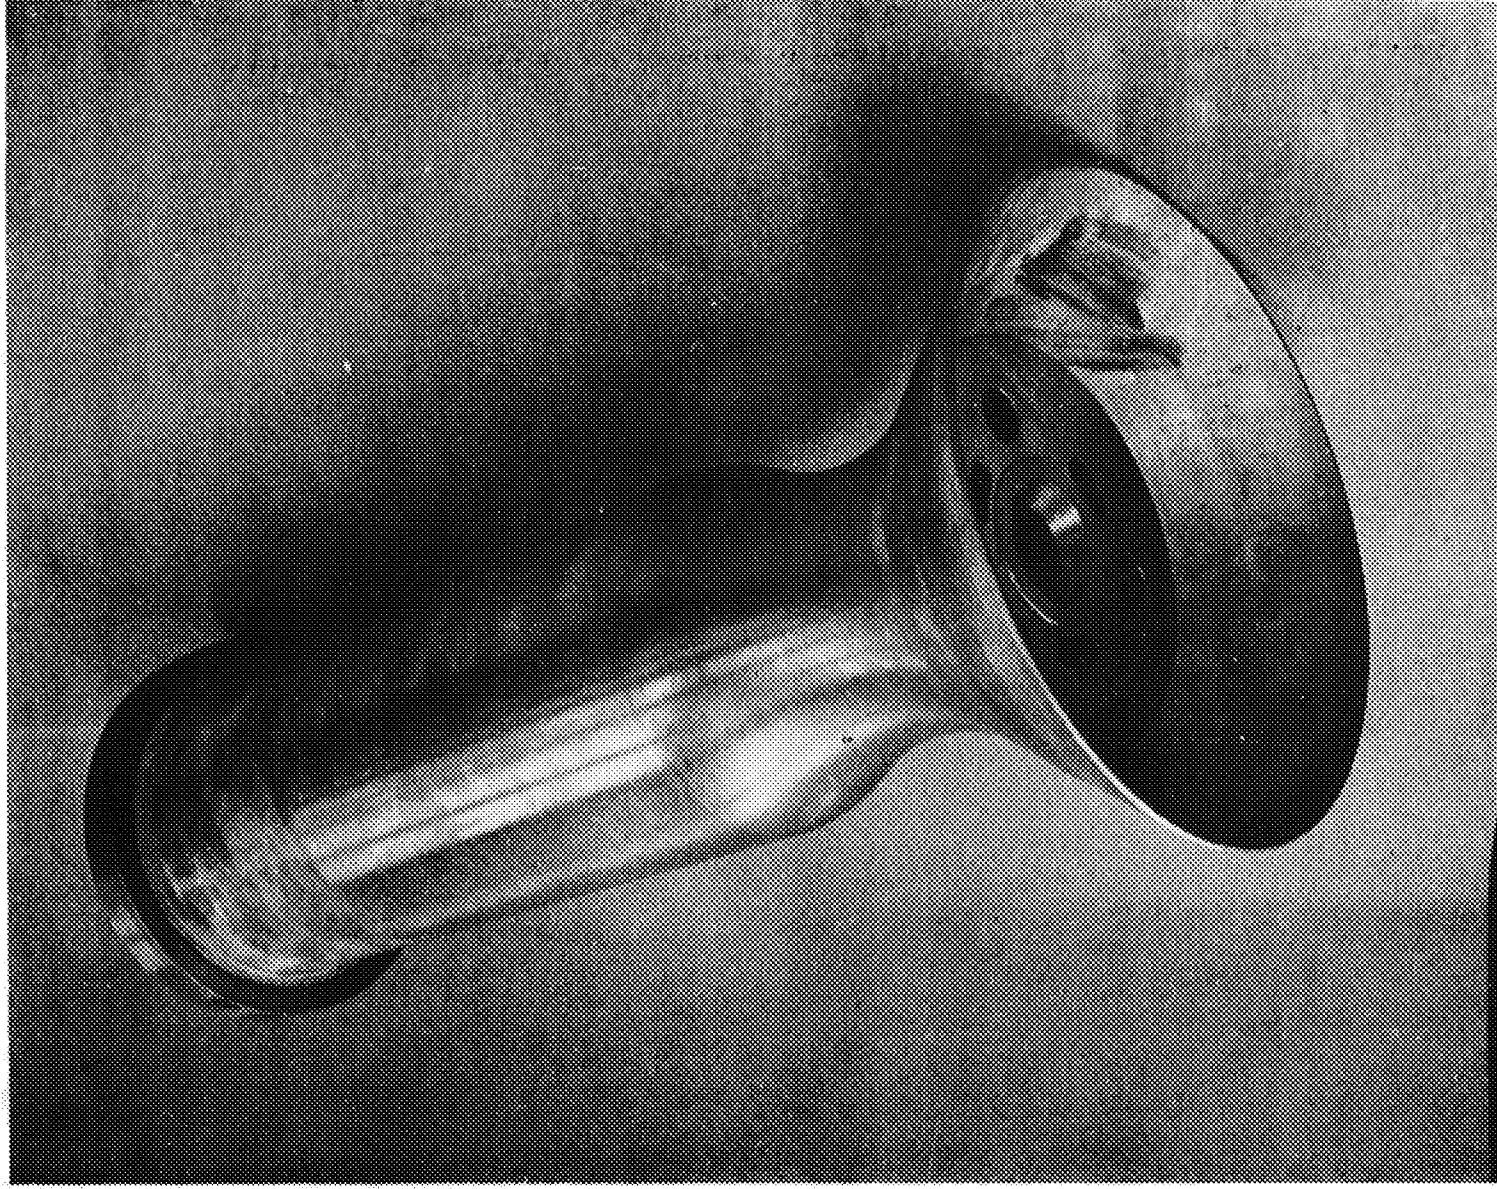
Fixturing for Weld Joint Machining of Forward Section
